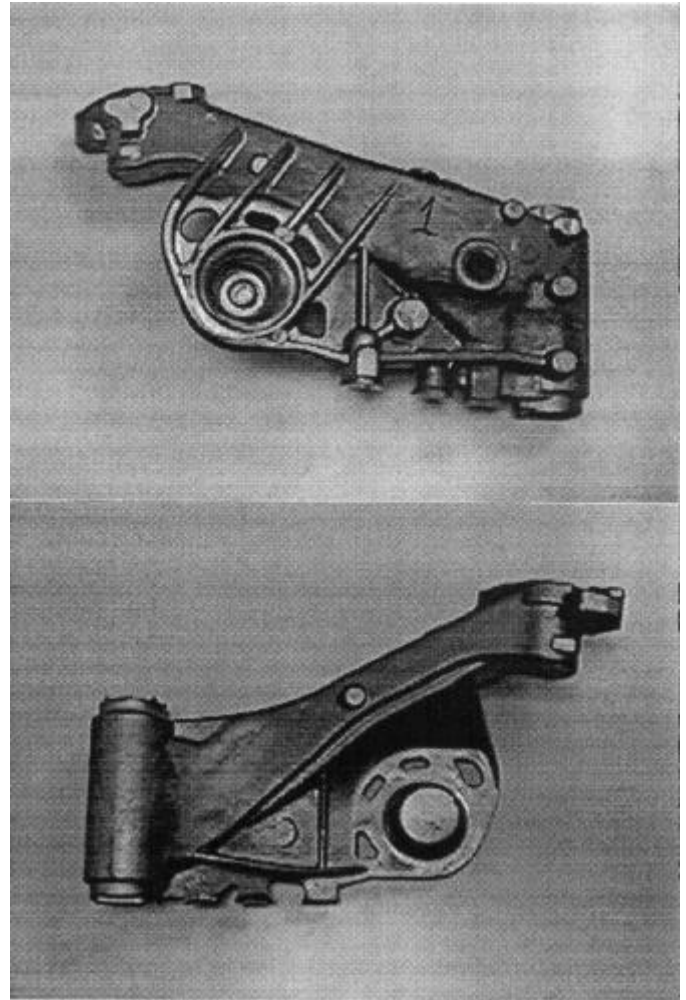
Hollow suspension arm for the Fiat Punto cast with the new core binder and de-cored using either compressed air or a water jet. Both top and bottom views shown.
